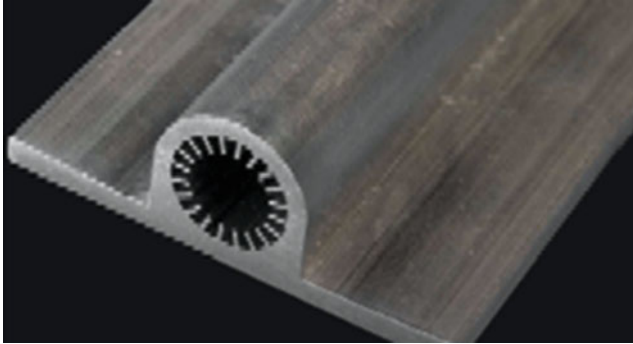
Axial groove extrusion CCHP with integral flange (Courtesy of ACT)
